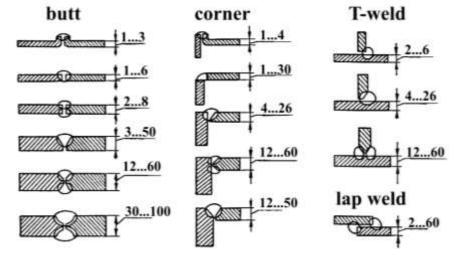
Basic types of welds produced by fusion welding (the figures are thickness of the parts be welded)
